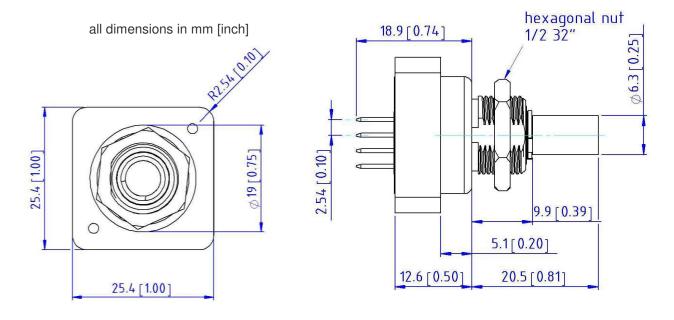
Dimensions of the ED-19-BB-XXXX-X-X (top and side view)
